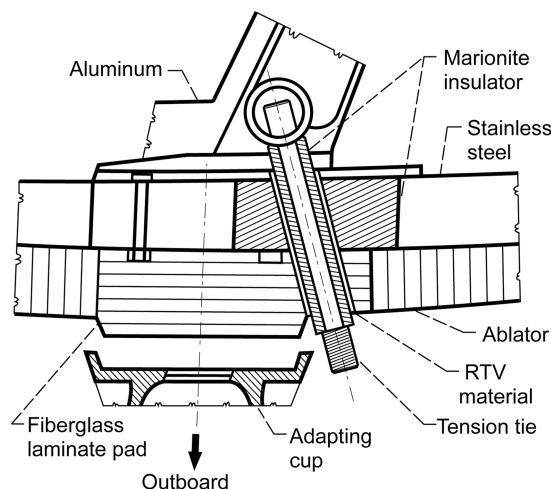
Sectional view of shear pad and tension tie bolt used to transfer loads from the service module to command module (Fig. 6 in [4]).
